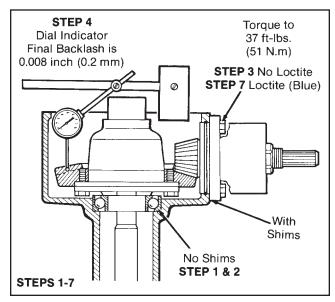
E-11. Pinion and Ring Gear Backlash Adjustment
